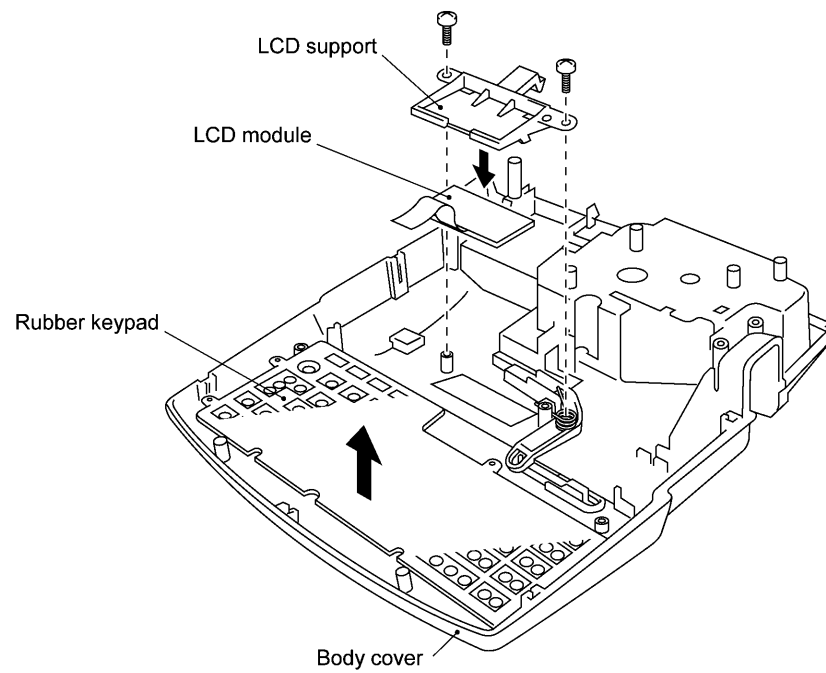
Removing the Rubber Keypad and LCD Module
